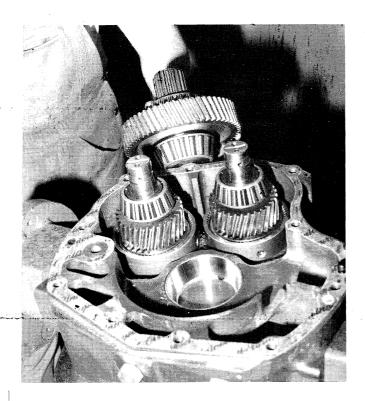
Removing or Installing Output Shaft and Gear Assembly.
